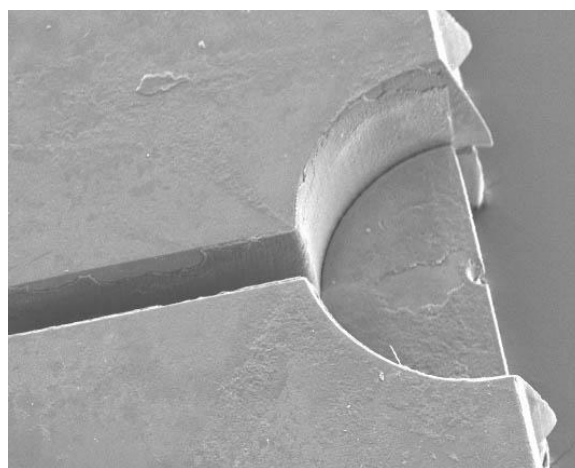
A 4-layer etch process and 2-axis scanning is used to form the channel, chamber, recess, and nozzle.
